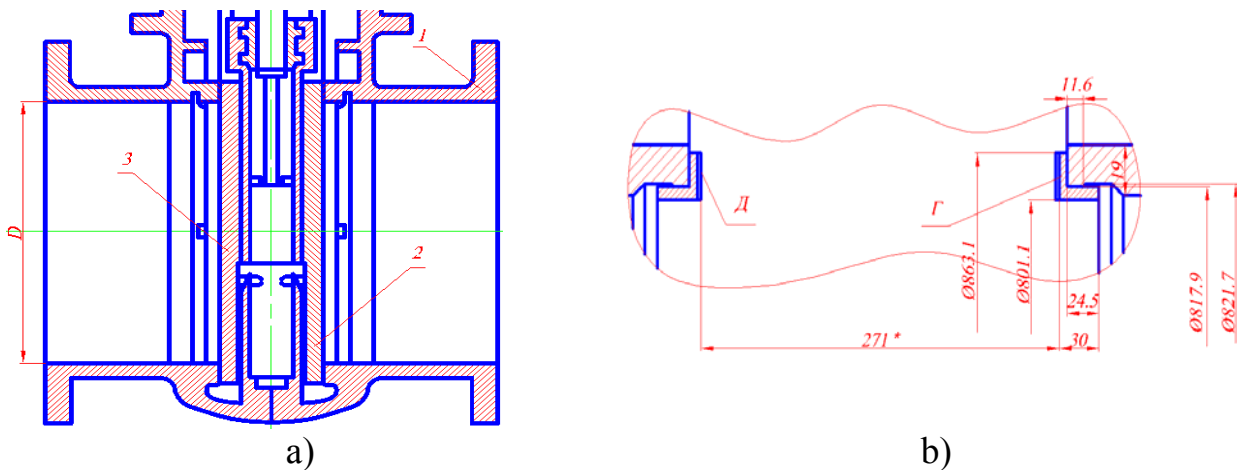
The pinch valve and the frame contact surfaces are to be grinded smoothly:
